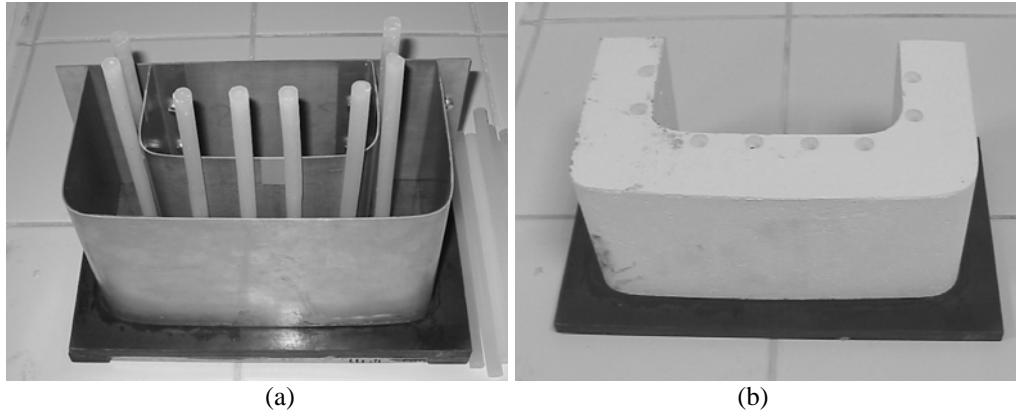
(a) The mold for casting the ceramic and (b) the appearance of the ceramic after sintering.
